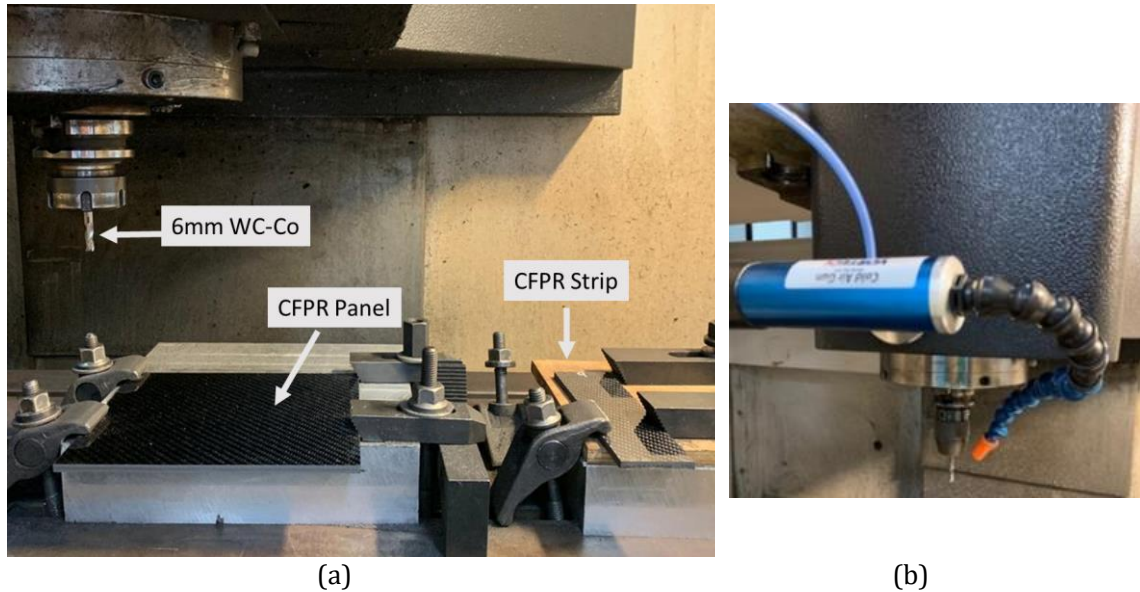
(a) Experimental setup for milling of CFRP with a variation of cutting speeds and cutting conditions and (b) set-up for milling CFRP in chilled air.
